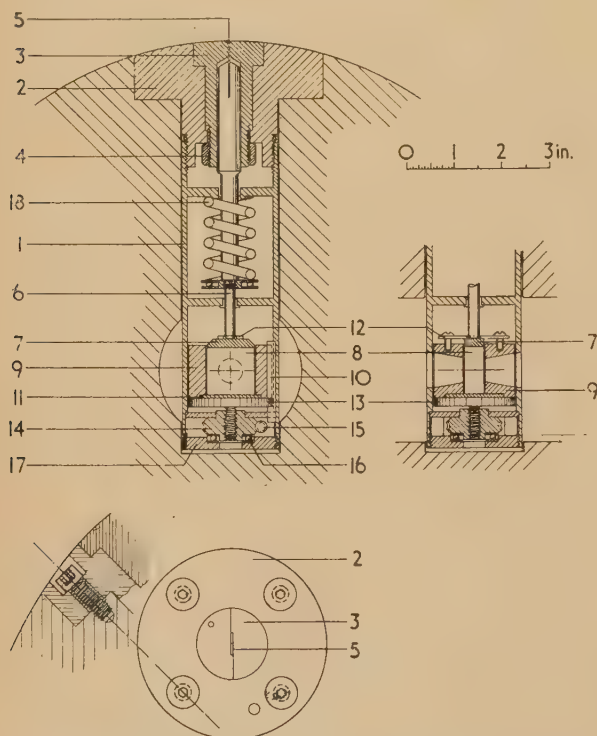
Simplified diagram of the pressure pin and glass block assembly
